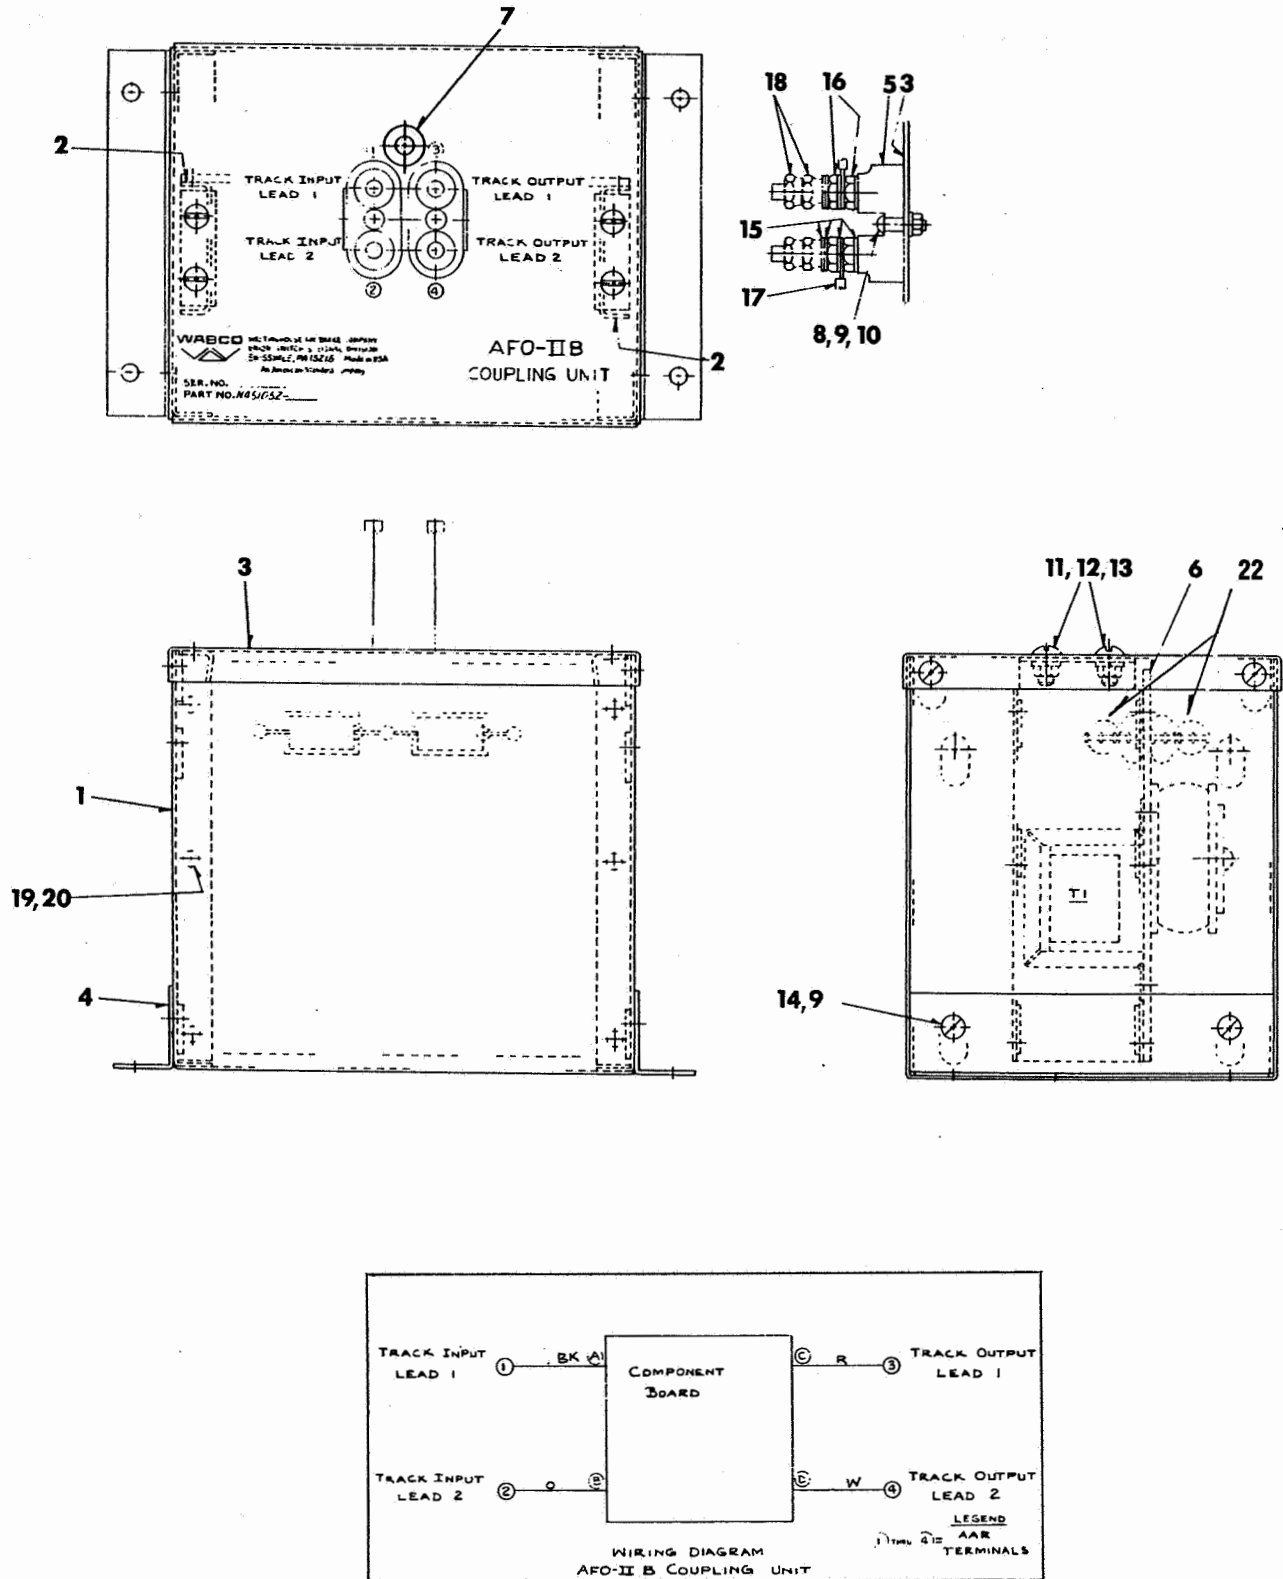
Track Coupling Unit Basic Main Assembly and Chassis Wiring
